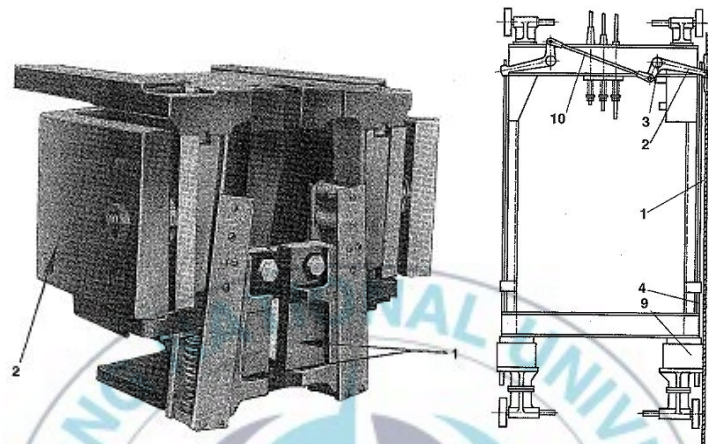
Operating mechanism of flexible guide clamp safety gear:
